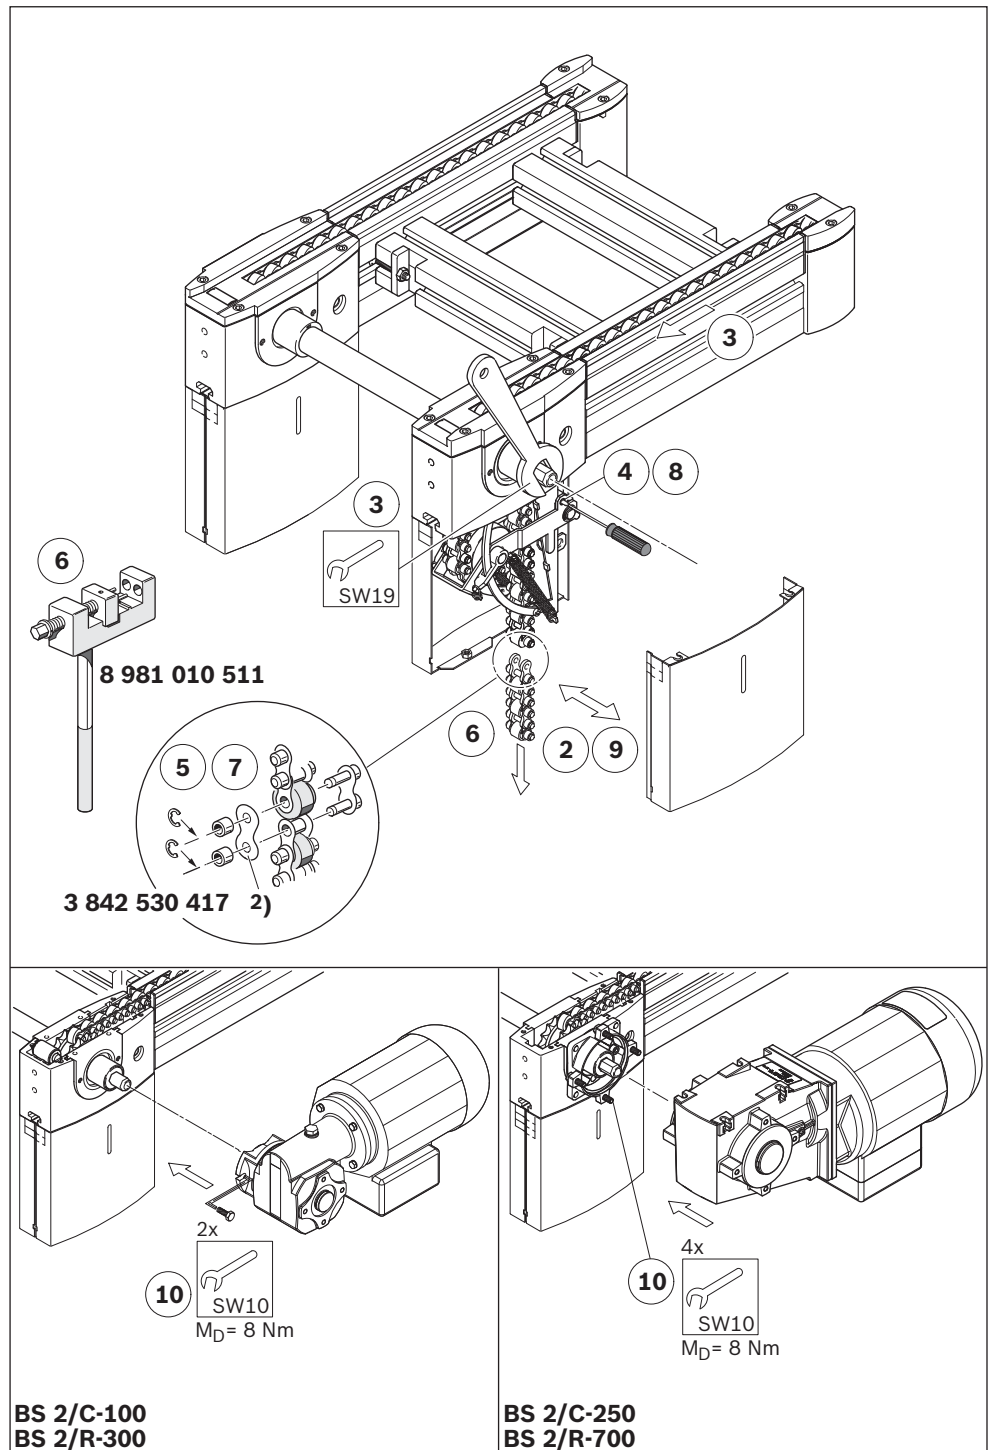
Shortening the conveyor chain: BS 2/C-100, ...-250, BS 2/R-300, ...-700, MA = R/L (2/2)
